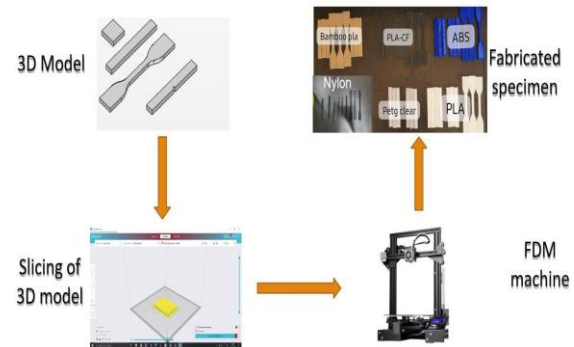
Fabrication Process of Test Specimens via FDM Technique
